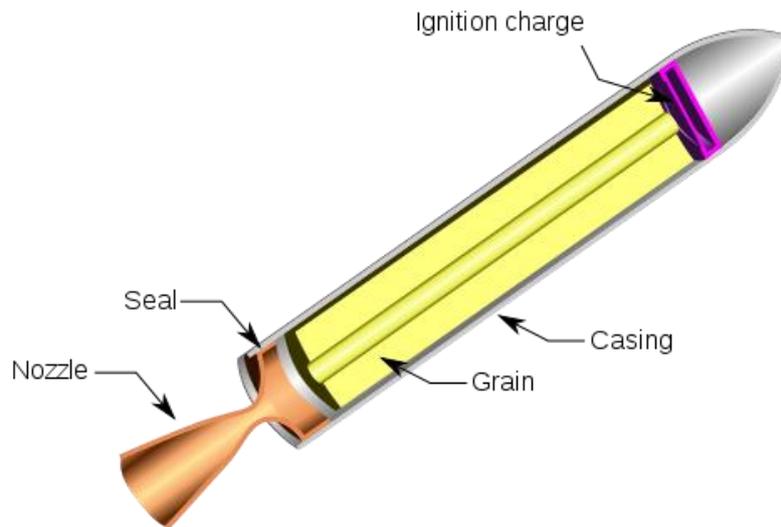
PARTS OF THE SOLID FUEL ROCKET
